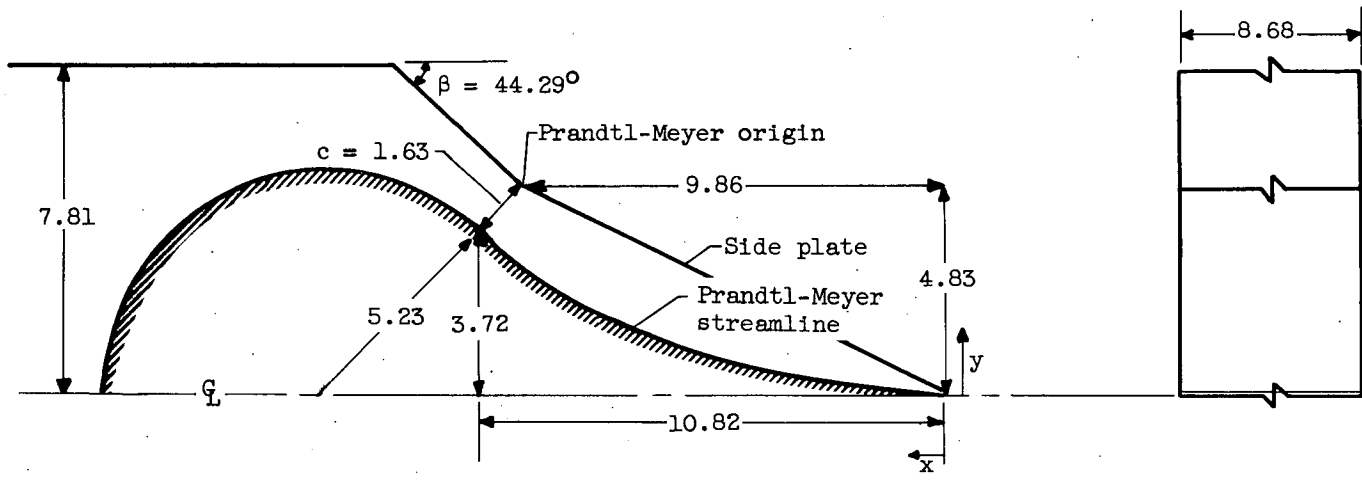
Prandtl-Meyer wedge nozzles. (Dimensions are in inches.)
